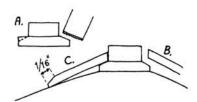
A, sanding the bevel into the keel rabbet; B, the lower edge of the garboard beveled to join the keel; C, the garboard fitted to the keel and section mold. Note the bevel to receive the second strake.
